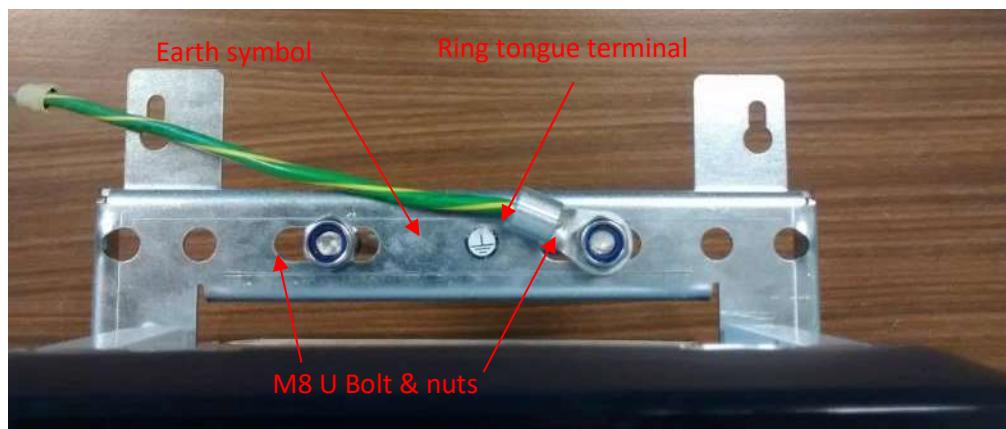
Wirnet Station mounting kit – earthing with U bolt configuration
